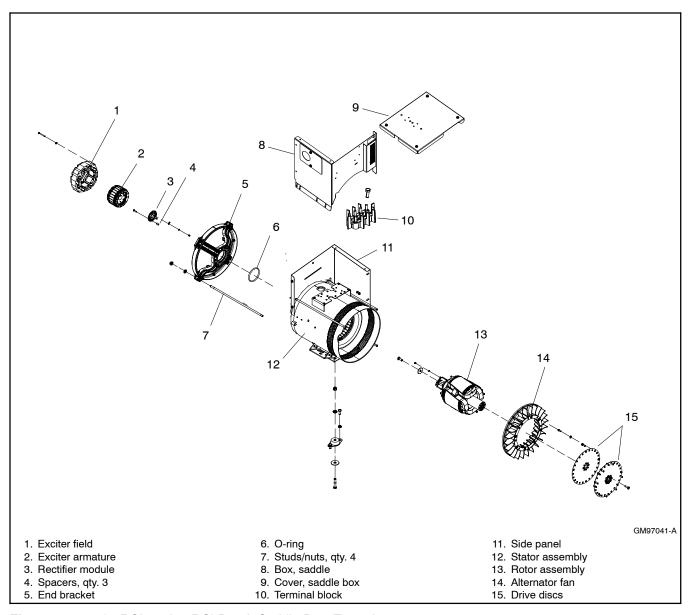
24/30RCL and 38RCLB with Saddle Box, Typical
